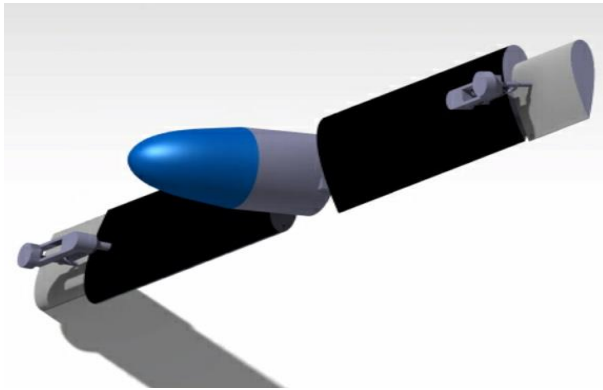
Telescopic Mechanism of the Rotor Blade.
